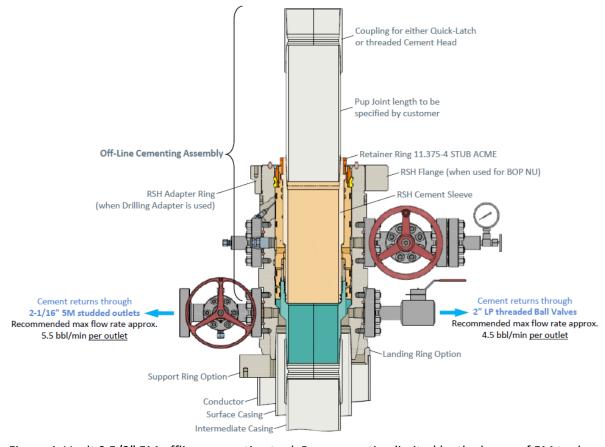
Vault 9 5/8" 5M offline cementing tool. Pressure rating limited by the lesser of 5M tool rating or the 9 5/8" pup joint and casing.
